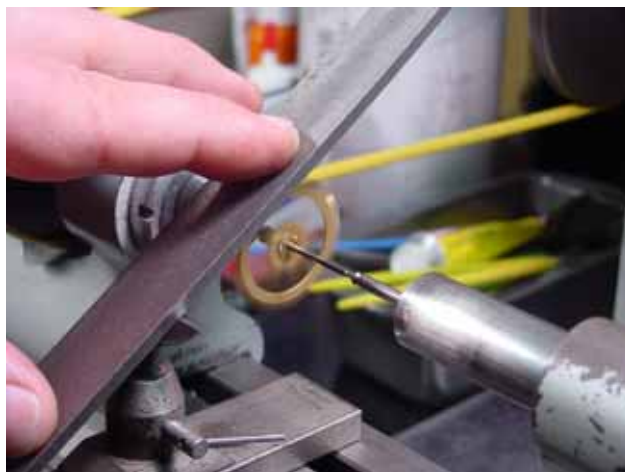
Using a file and T-rest to machine the escape wheel to true. (There are better ways.)
